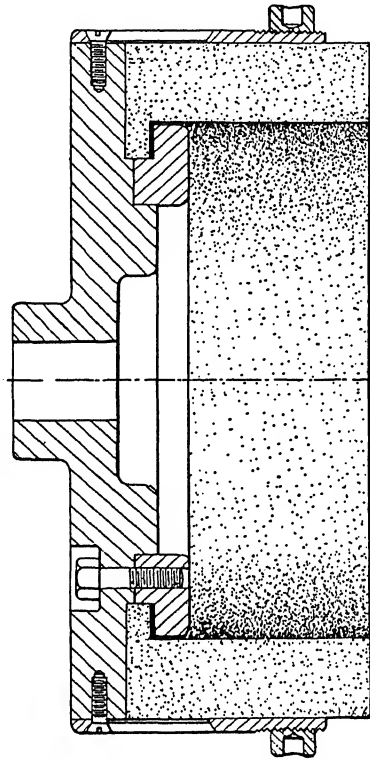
Cup Wheel Mounting, with Safety Ring
